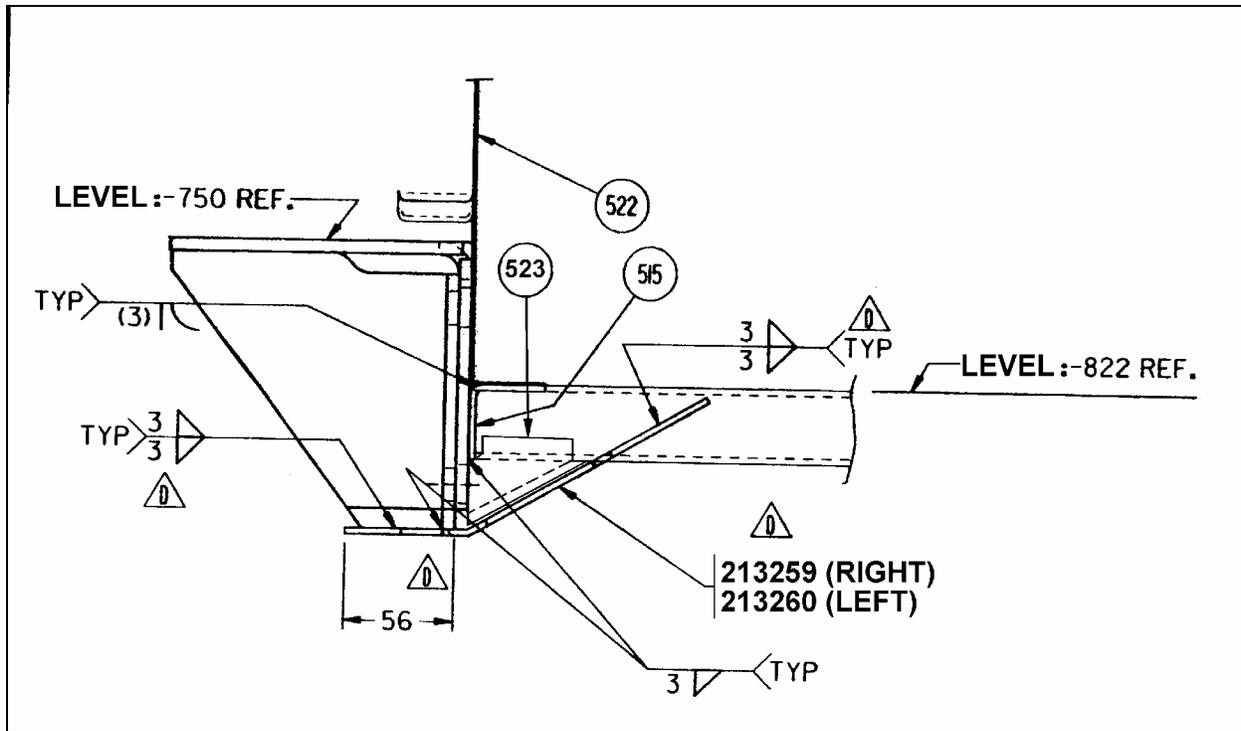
HORIZONTAL REINFORCEMENT PLATE
